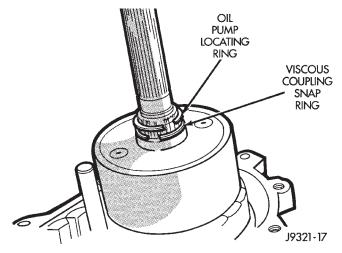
Progressive Coupling And Oil Pump Snap-Ring Installation
